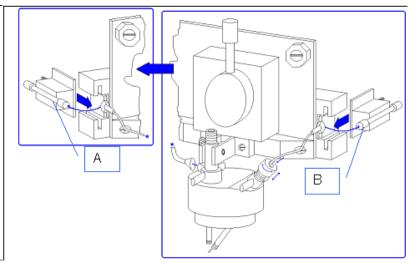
A show the sensors installed on the left side of the valve tap. B shows the sensor installed on the right side of the valve tap.
